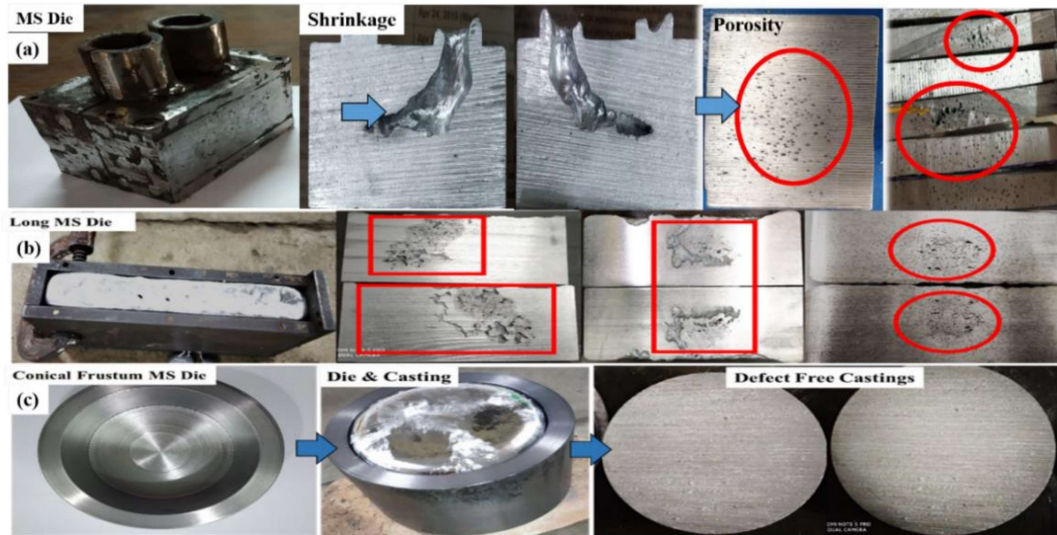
Casting trials on mild steel closed die, open die, and conical frustum die
